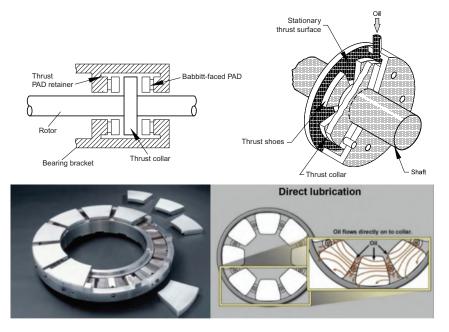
Top left*: Schematic illustrating the components of a thrust bearing; *Top right*: Threedimensional cutaway of a thrust bearing; *Bottom left*: Thrust bearing; and *Bottom right*: Direct lubrication of thrust bearing.
